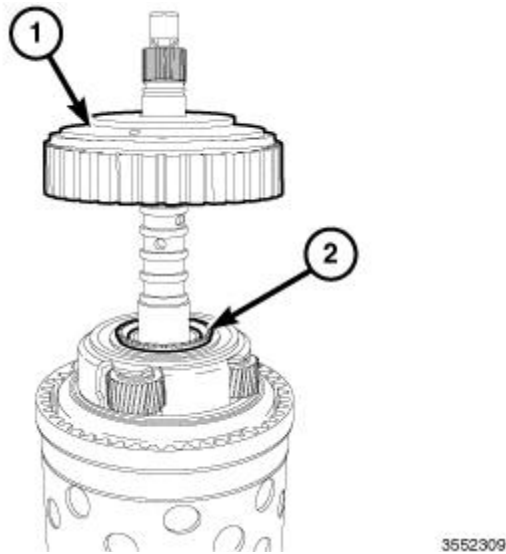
P1 Annulus/B-Clutch Hub Assembly, Needle Bearing And Holding Plate
